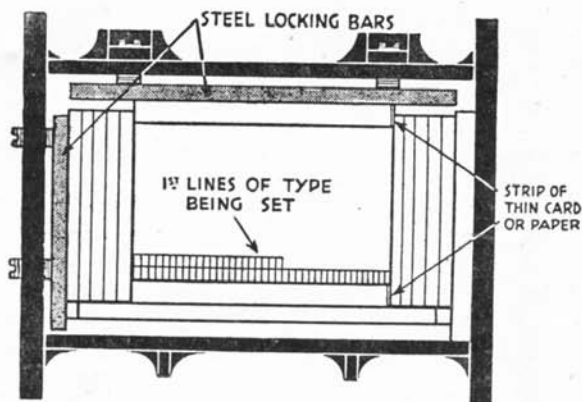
Setting Type direct in the Machine Bed. Stage three. A few lines of type already set.
